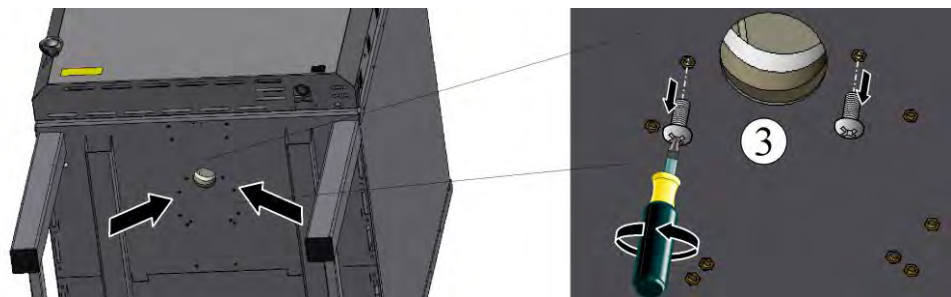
Undo the screws of the air inlet flap (similar to picture)
